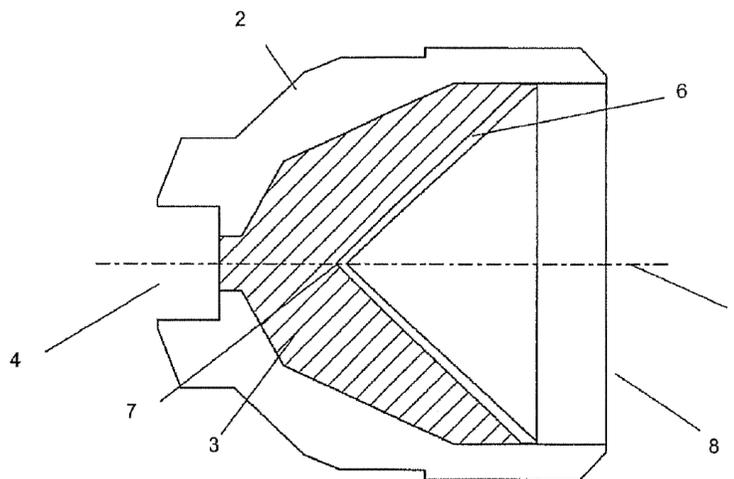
is a cross-sectional view of a shaped charge that includes a substantially cylindrical housing 2, a liner 6 that fits closely in the open end
